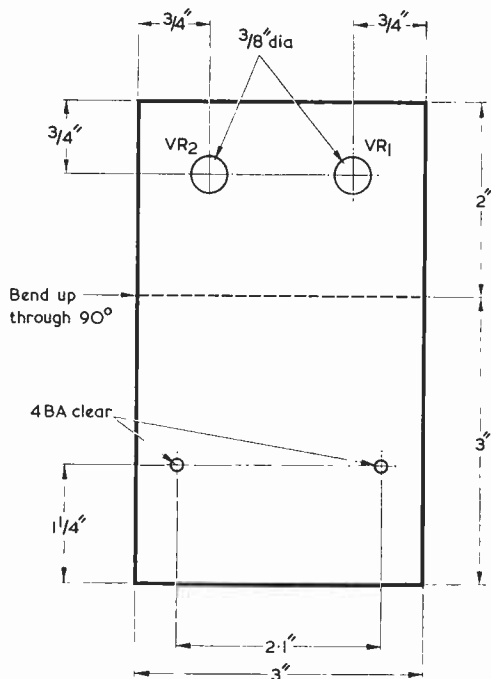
The chassis has the dimensions shown here. The material is aluminium sheet of any convenient gauge
